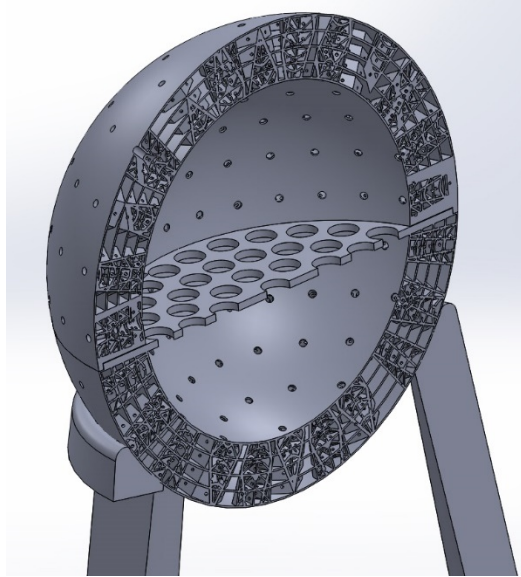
Assembled AMM Sphere - CAD - Vertical Cross-Section View
